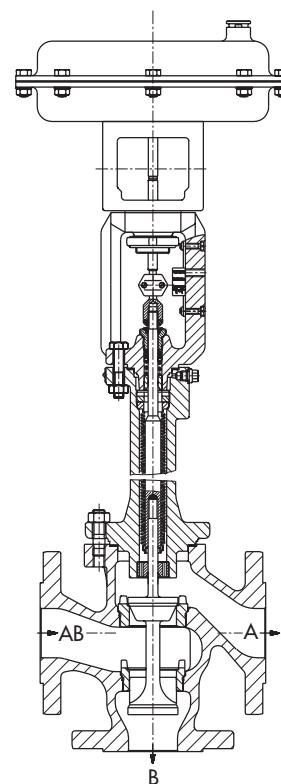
· Type 3244/3277 Pneumatic Control Valve with: Type 3244 Three-way Valve (plug arrangement for flow-diverting operation), with additional metal bellows seal and Type 3277 Pneumatic actuator
